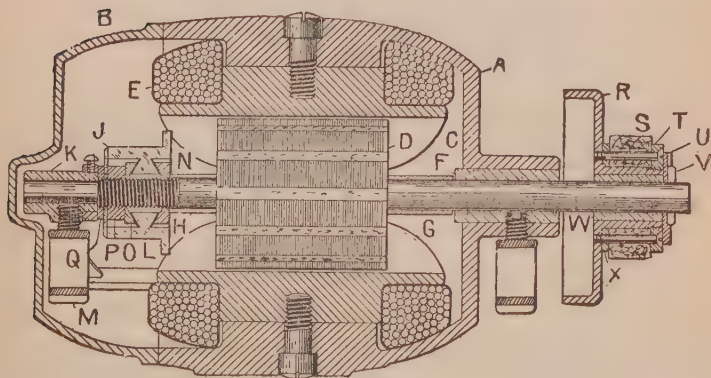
Sectional diagram of the Apple igniting dynamo. The parts shown are: A, cast iron body containing the moving parts; B, hinged lid of the body; C, one pole piece of one of the field magnets; F, brass bearing of the armature spindle; G and H, fibre tubes surrounding the spindle; K, brass spider supporting the spindle; L, commutator; M, wick feed oil cup; N, beveled nut supporting the commutator; O, P, Q, supports of the commutator; R, the driving disc; S, lever friction pinion. This machine can generate a direct current at 8 volts at a speed of between 1000 and 1200 revolutions per minute. It is provided with a simple centrifugal governor that automatically interrupts the driving connections when a certain speed has been exceeded.
